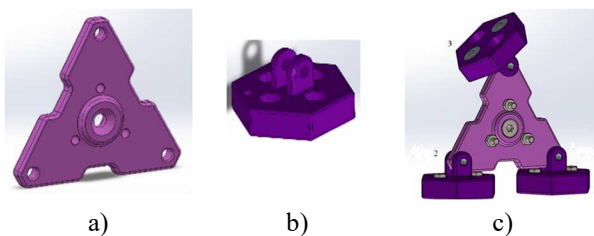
3D model of the locomotion units: a) triangular support, b) module, c) assembled locomotion unit [13].
